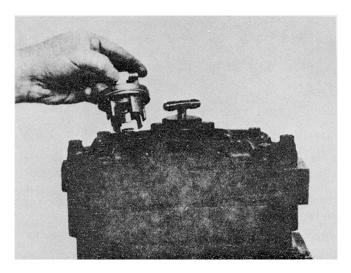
B-2. Remove Valve Retainers and Unloader Caps
